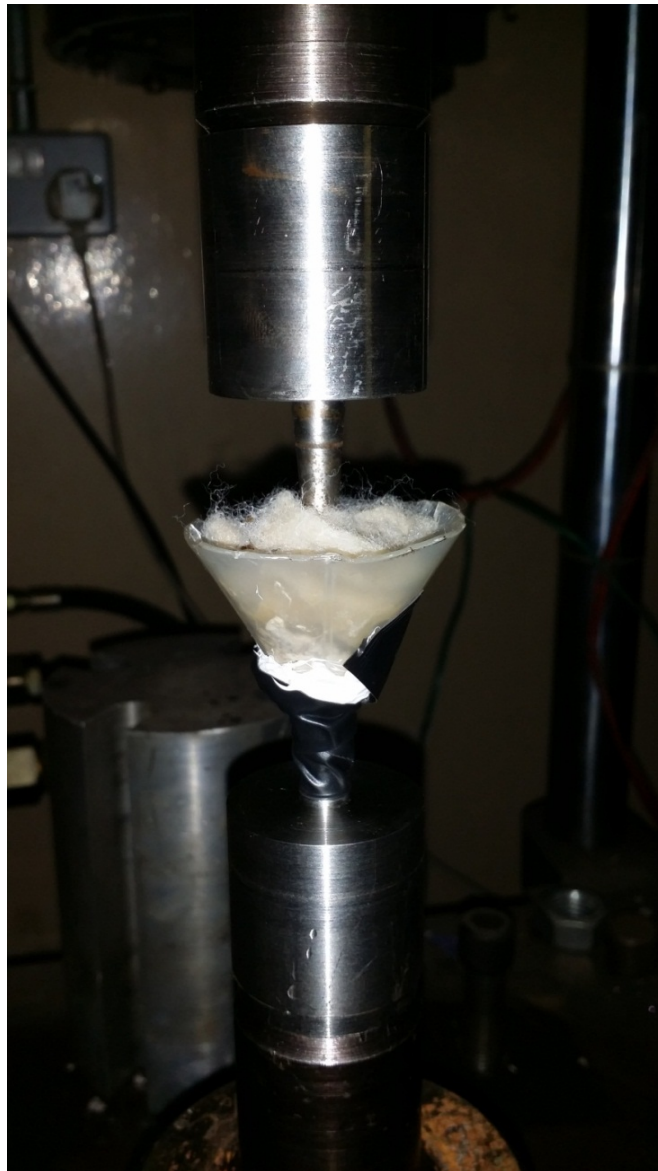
4330 continuous radius specimen in Denison-Mayes servo-hydraulic universal testing machine - Corrosion attachment and adapters also shown in image.
